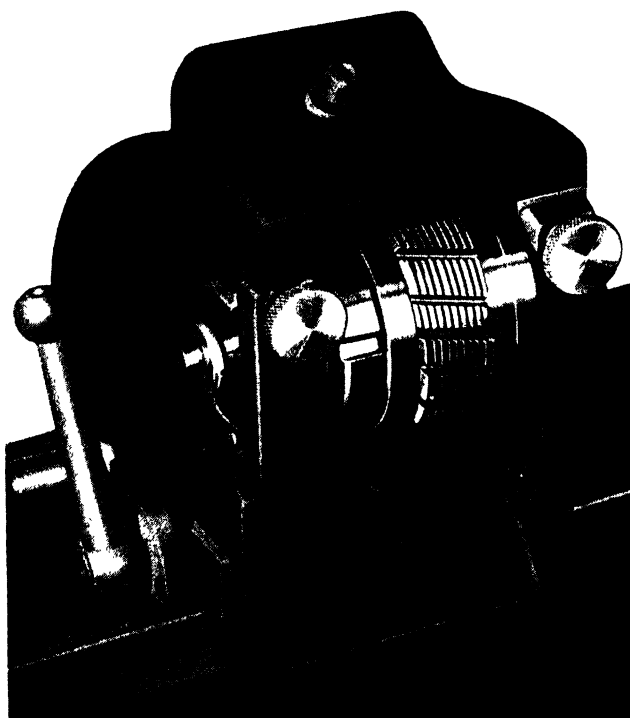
WHEEL-CRUSHING ATTACHMENT FOR NEWALL MACHINE
